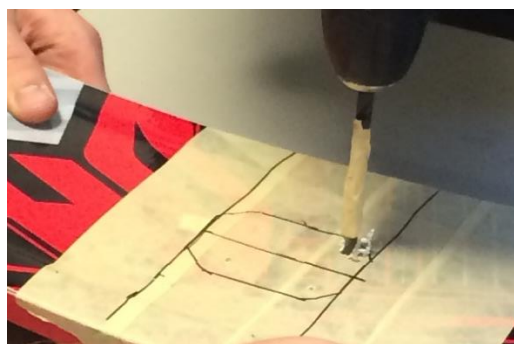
The First Step to Potting: Drilling the Holes for Insert Placement
